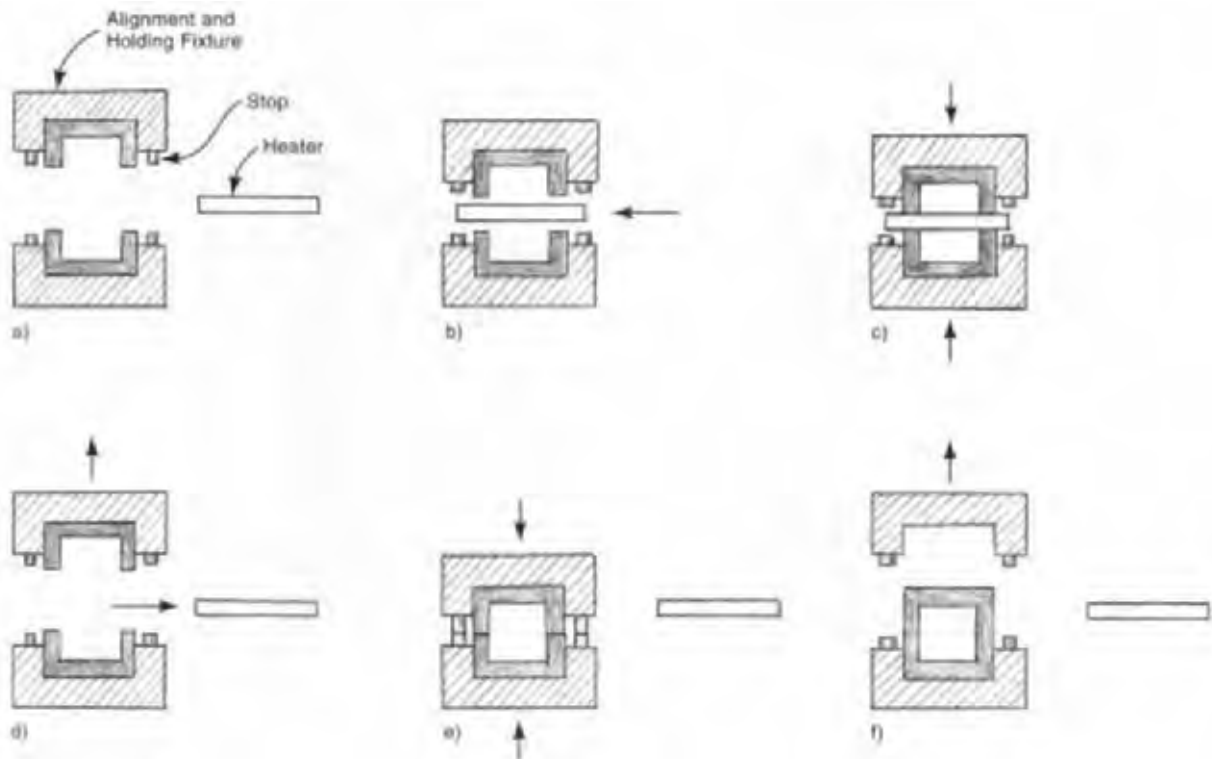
L2 Hot plate welding: a) Parts to be joined are inserted in the alignment and holding fixture; heater is nearby, b) Heater is placed between the two parts, c) Fixture closes to bring parts and heater in contact, d) After part surfaces are sufficiently heated, fixture opens and heater is withdrawn, e) Fixture closes, bringing the softened surfaces together. Stop pins prevent excessive force against parts. f) After part surfaces cool, fixture opens so that welded part can be removed.
